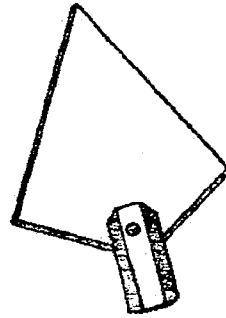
Hook Assembly for  $13/32$ " and  $1/2$ " Cable
